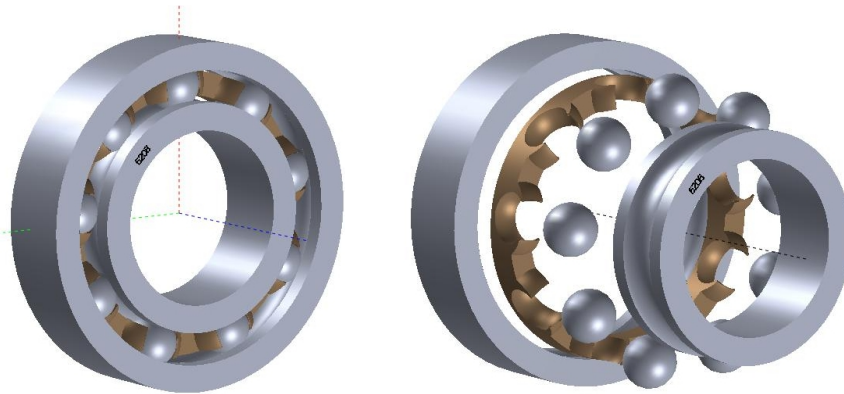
A common ball bearing. To the right in exploded view. The bodies in the model are: (1) an outer ring; (2) a cage; (3) nine balls; (4) an inner ring. All elements are steel, except the cage which is plastic.
